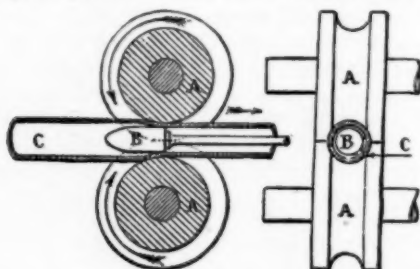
WELDING LAP-EDGED TUBES BY ROLLERS.
